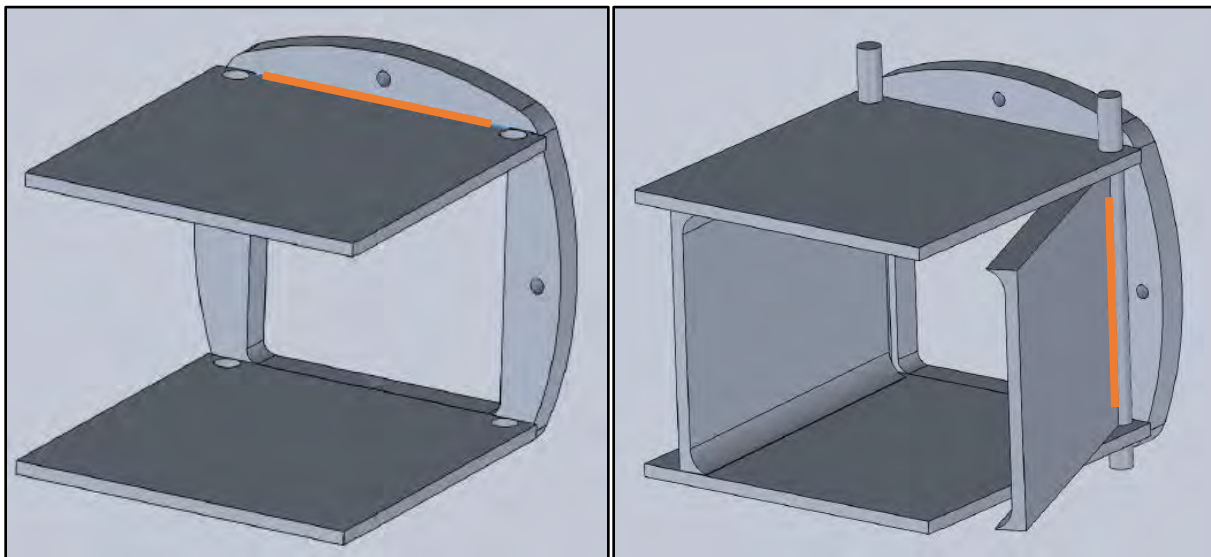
The assembly of the diverging section, showing the welding required for the top flaps (left) and for the side flaps (right).
